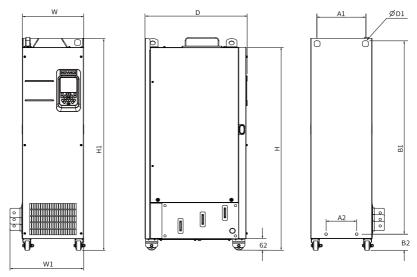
Outline dimensions and mounting dimensions of T10 to T12 models (without AC output reactor)
